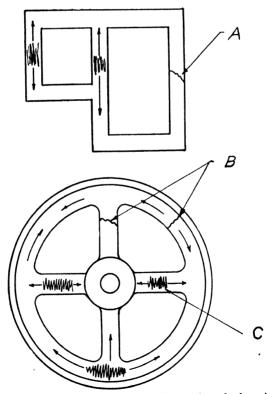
Local preheating of a structural cast iron body: A. The fracture, B. The fractures, C. The shaded zones represent preheated parts
